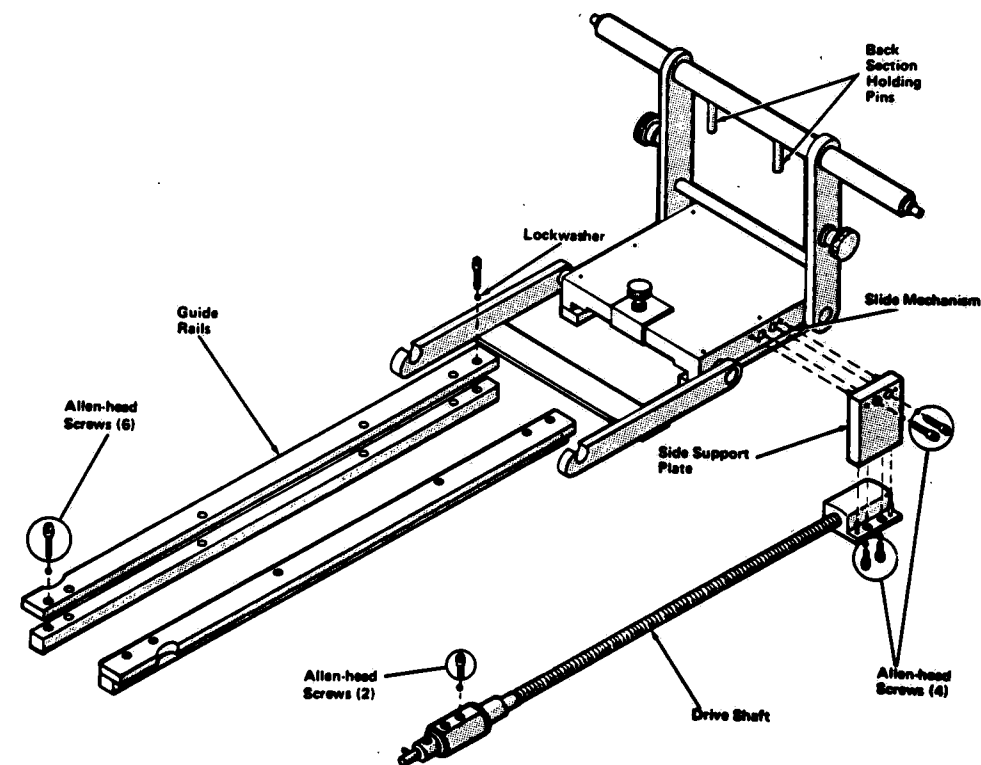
DRIVE SCREW AND SLIDE MECHANISM ASSEMBLY.
